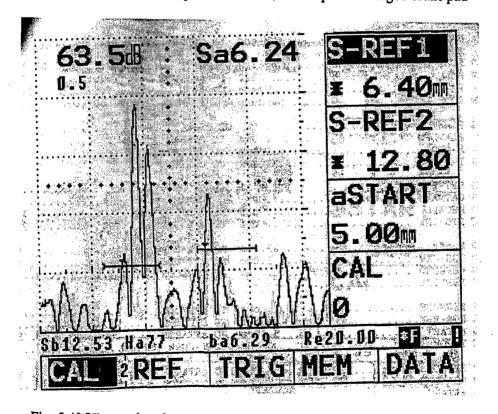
Ultrasonic echo pattern FM14AA1 Hot powder forged brake pad
